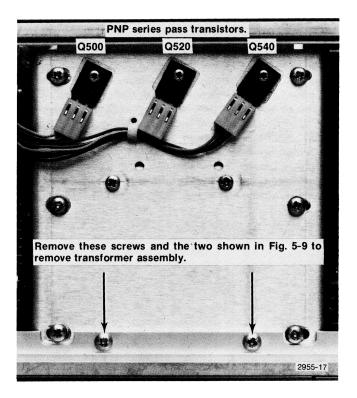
Location of PNP series pass transistors and partial transformer removal.
